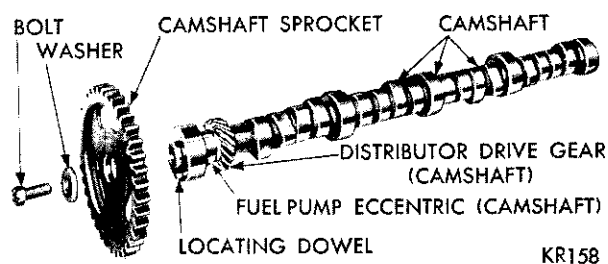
Camshaft and Sprocket Assembly (Disassembled View)
